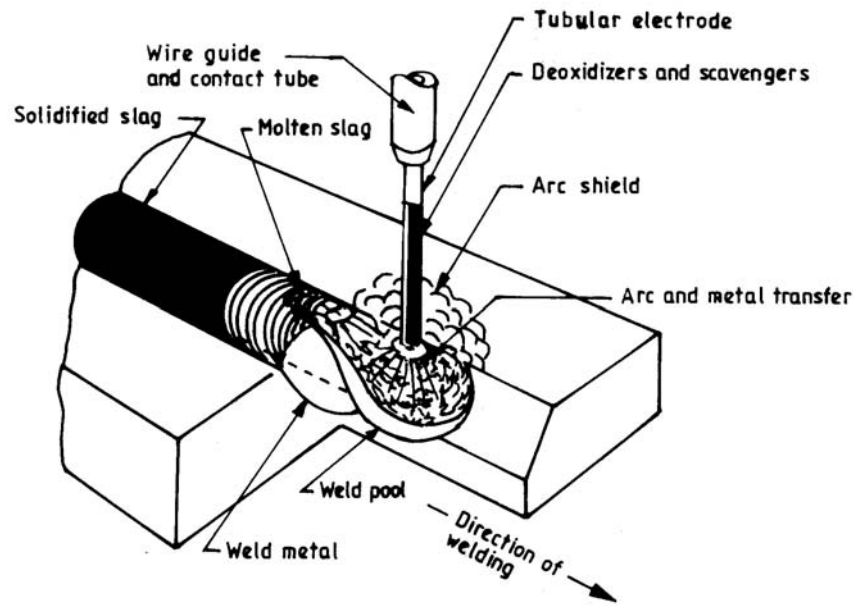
Schematic of Flux Cored Arc Welding
